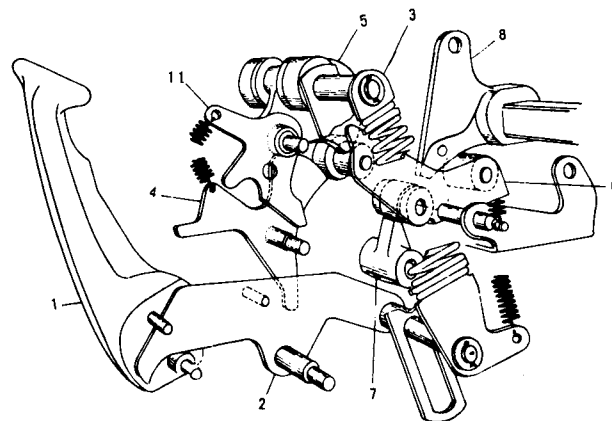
Mechanism ready to be charged by operator preparatory to closing of the circuit breaker contacts.
